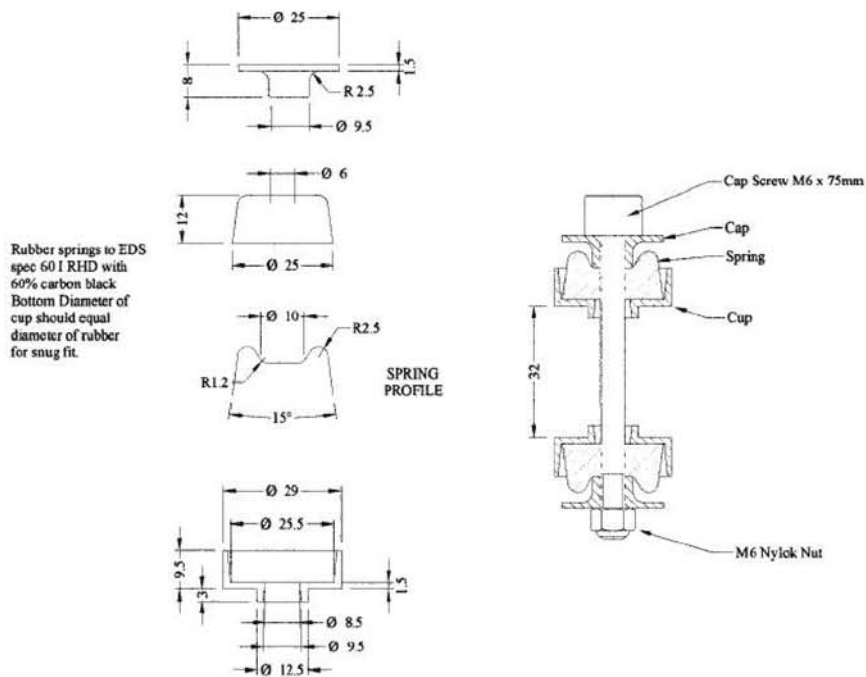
Swing link rubber suspension unit for 5in. gauge driving and passenger cars.
